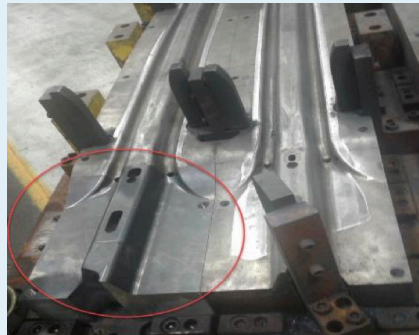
L-40 Hot Stamping Die Cavity (piece shown Page 1)
